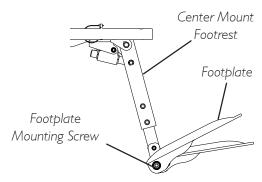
ADJUSTING THE FOOTPLATE ANGLE
